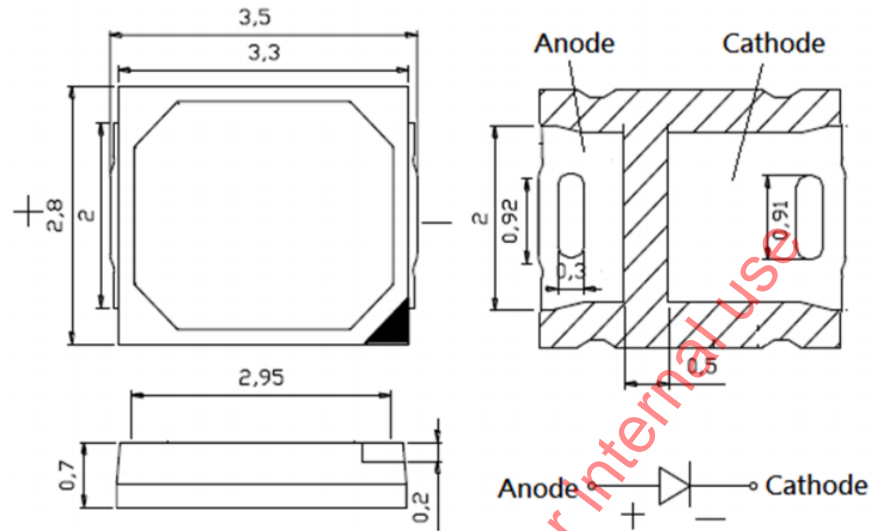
Mechanical Drawing for LUXEON 2835. All dimensions are in millimeters.
